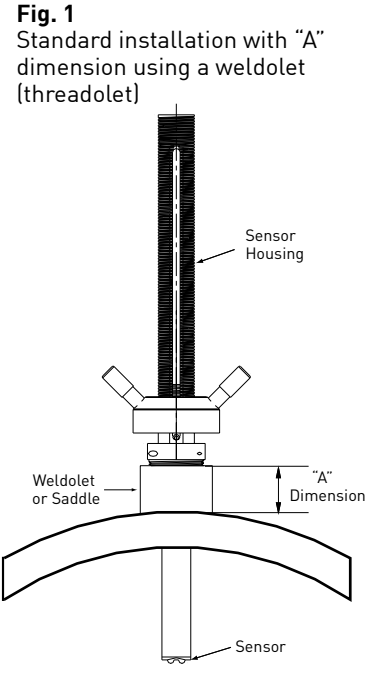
Standard installation with "A" dimension using a weldolet (threadolet)
